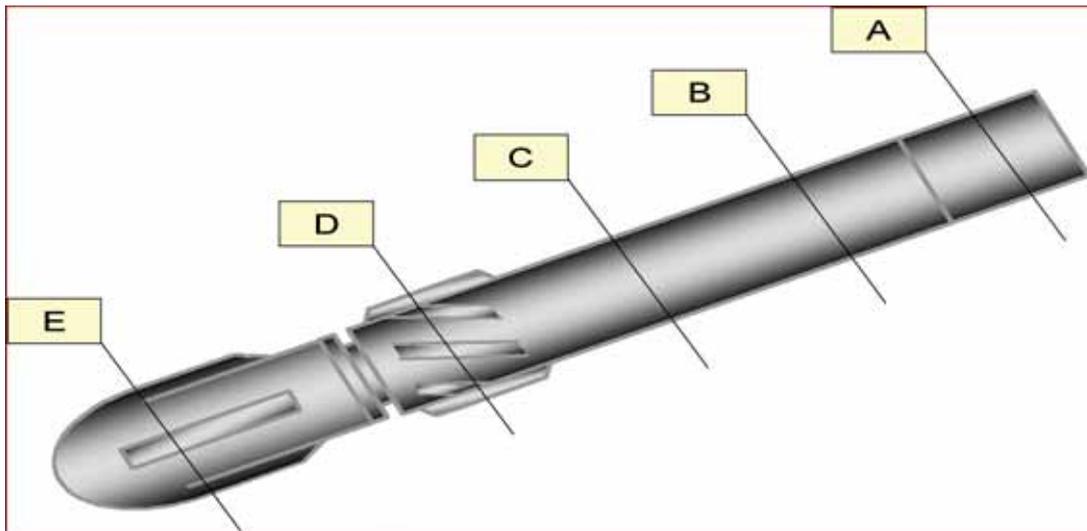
Drillable Reamer, Stabiliser and Power Module.
